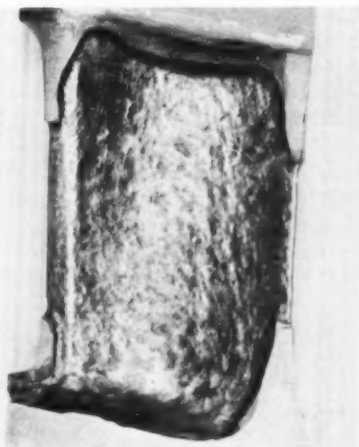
Illustration showing rough pitted results obtained when solution is too hot.
